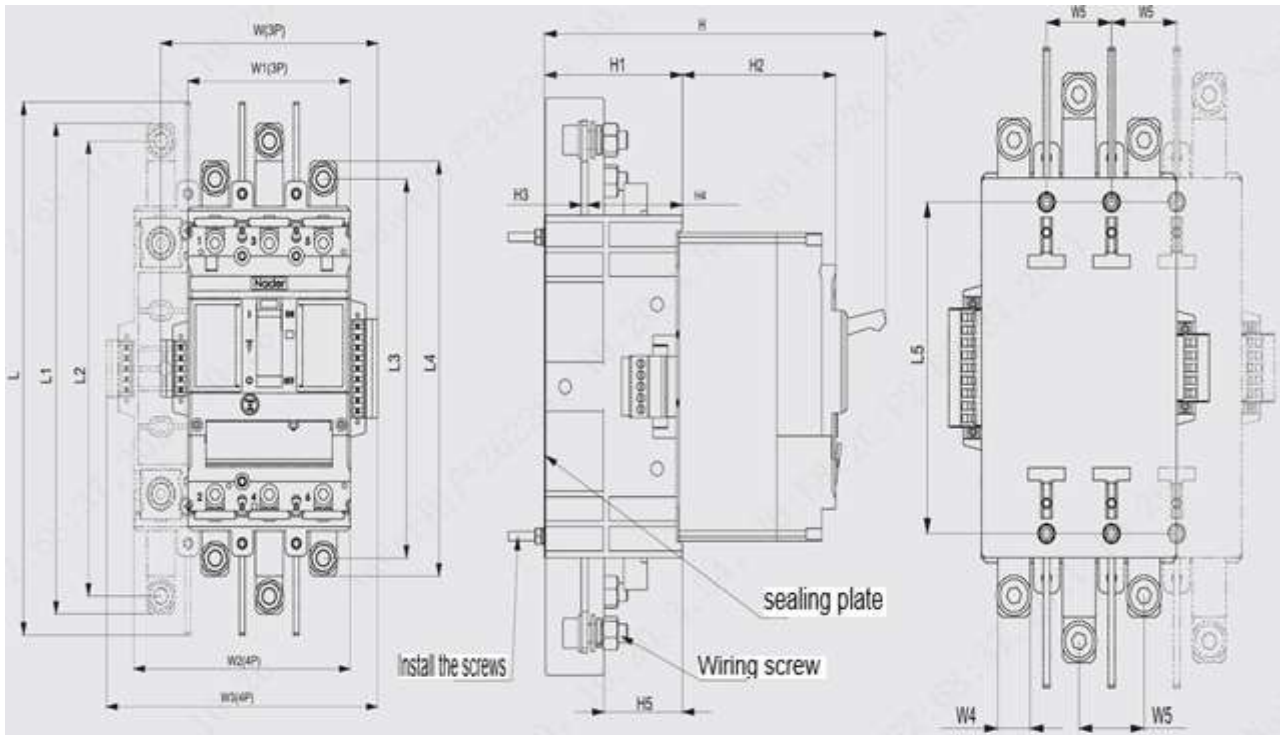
3P、4P Outline and installation dimensions of plug-in board front wiring
